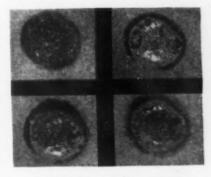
Uneven surface of spot welds made with a "mushroomed" electrode.
